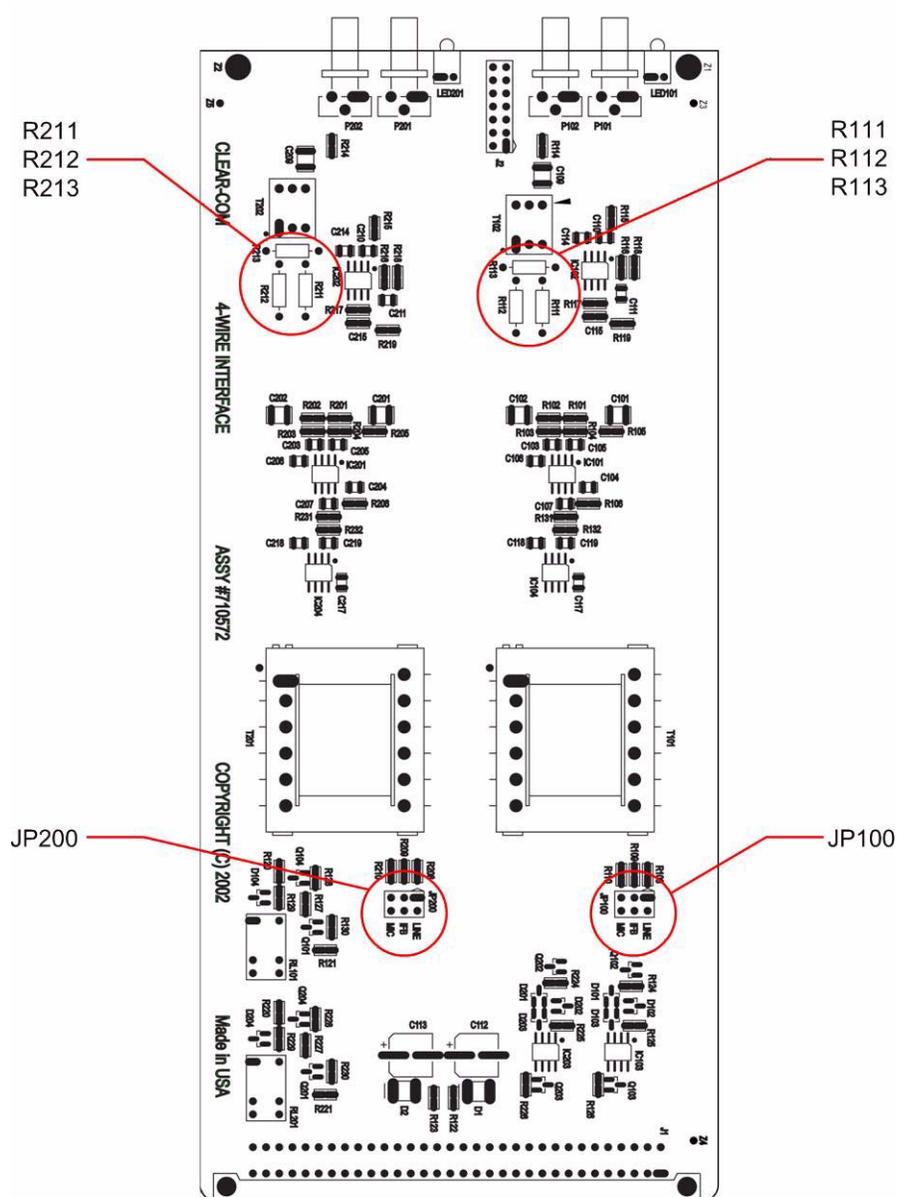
FOR-22 Main Board PCB (Part No. 710572)
